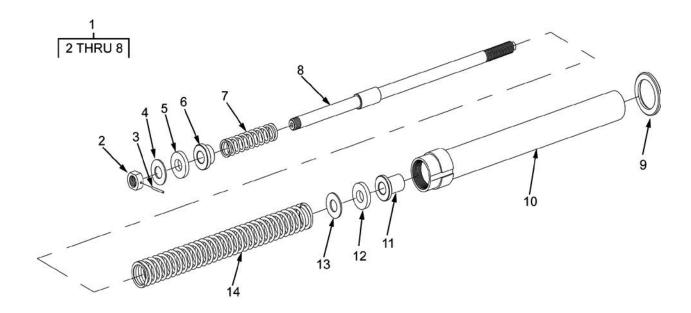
Recoil Mechanism Buffer 13015880 and Recoil Mechanism Buffer 13015890.
